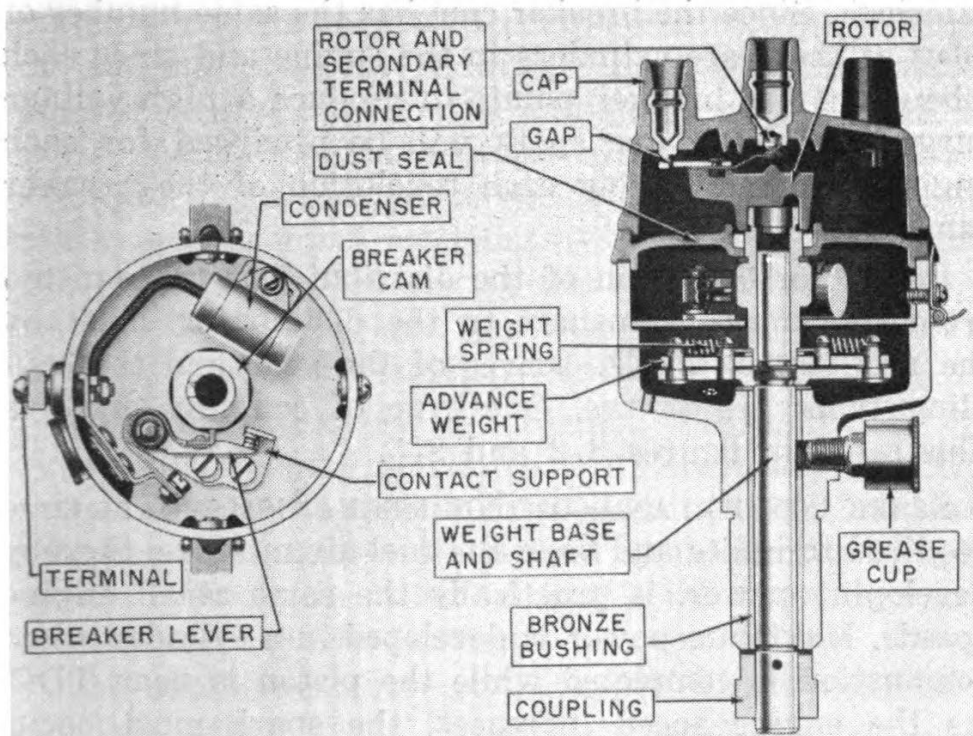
Cross-section of a distributor (General Motors Corporation, Delco-Remy).
